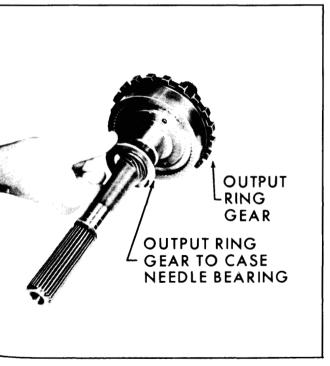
Removing Output Ring Gear Needle Bearing Assembly
